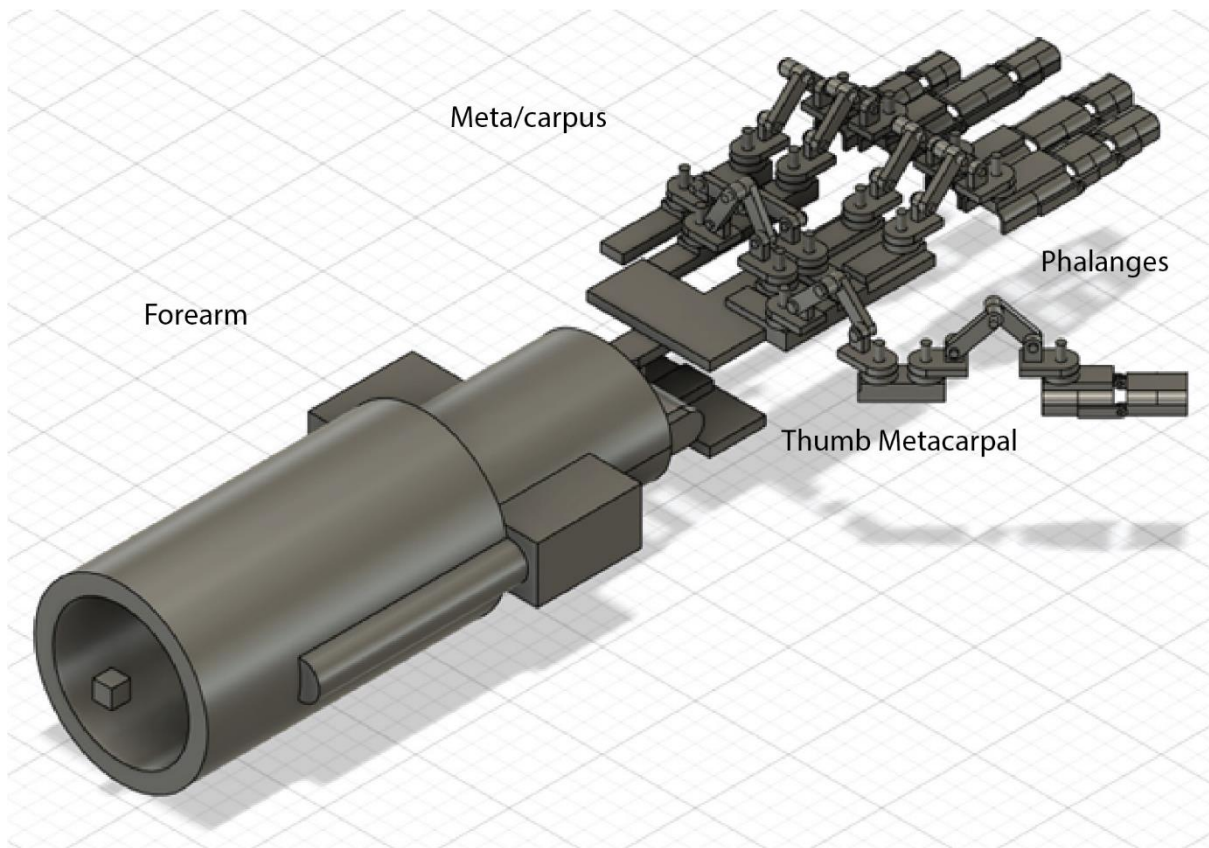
Complete Orthosis Model Assembly, with wrist interface component. Isometric view.
